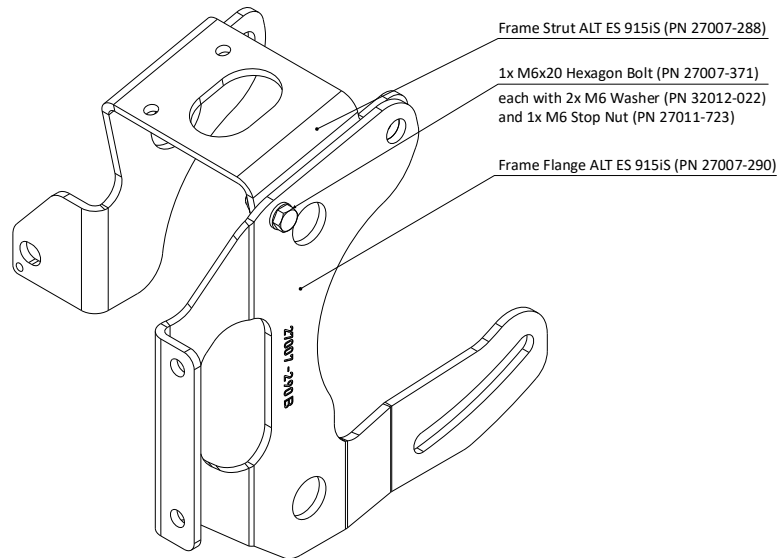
Isometric View Ext. Double Alternator Kit 2x 70A Rotax 915iS Frames Bank2
